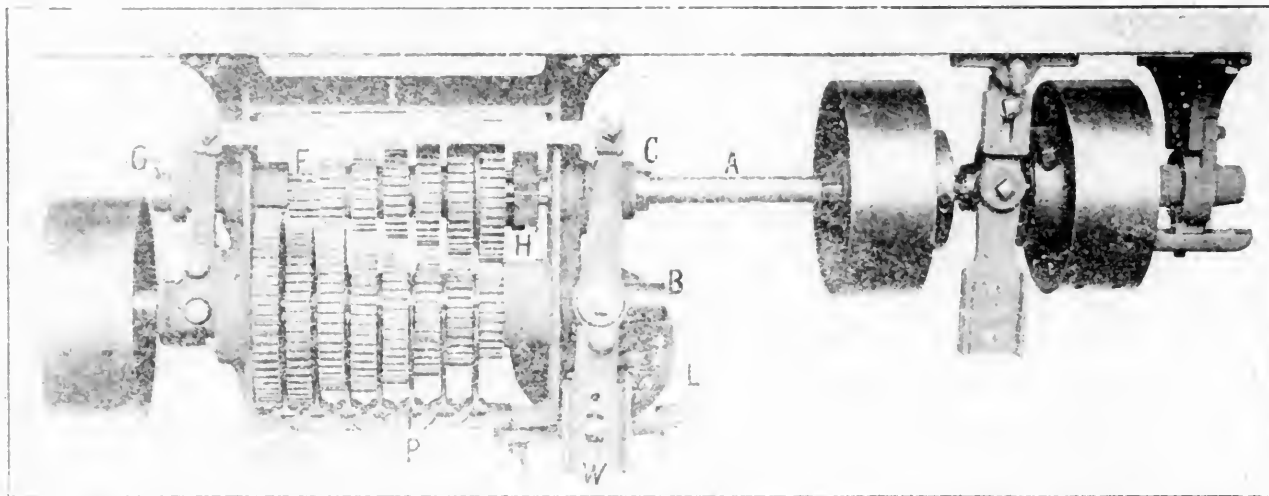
FRONT VIEW WITH COVERS REMOVED, SHOWING SHIFTER LEVER AND CONNECTING ROD TO SLOW-SPEED CLUTCH.
